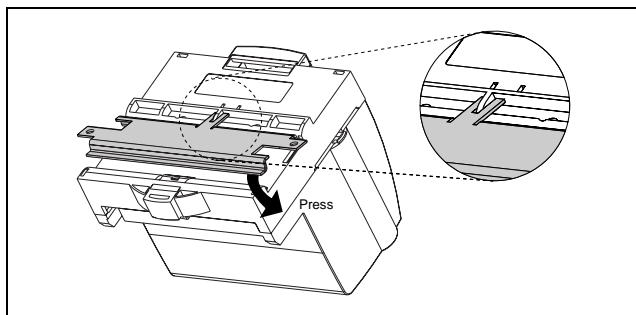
Mounting the FP-1600 onto a Panel Mount Accessory
